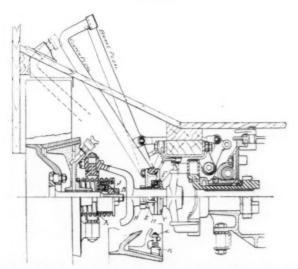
Clutch of Small Dimensions for 30-h.p. Car
